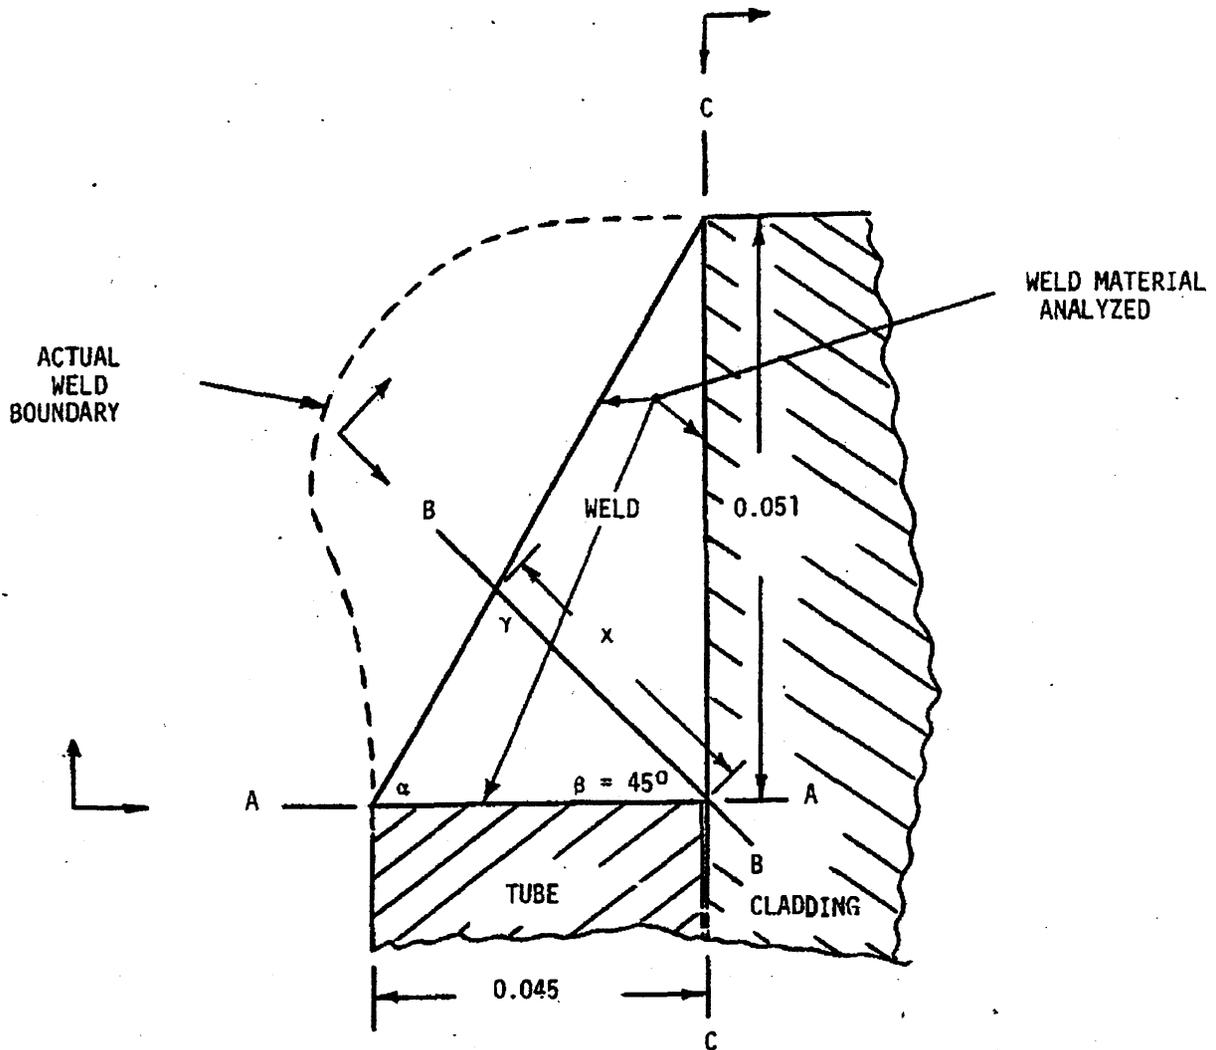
As-Fabricated & Analyzed Tube-to-Tubesheet Welds
